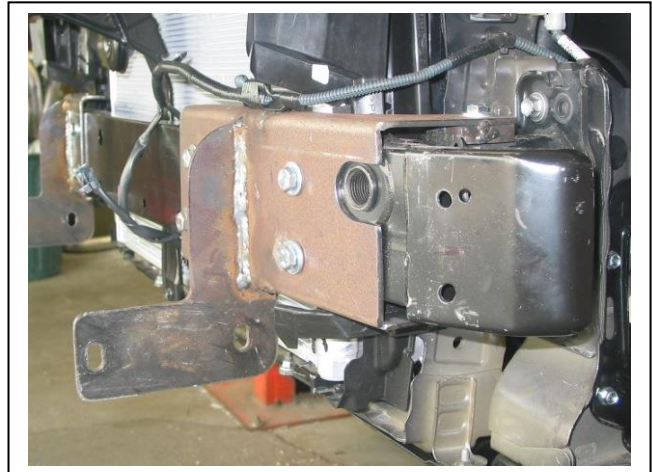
Steel mounting bracket fitted to bumper support - Passenger side shown
